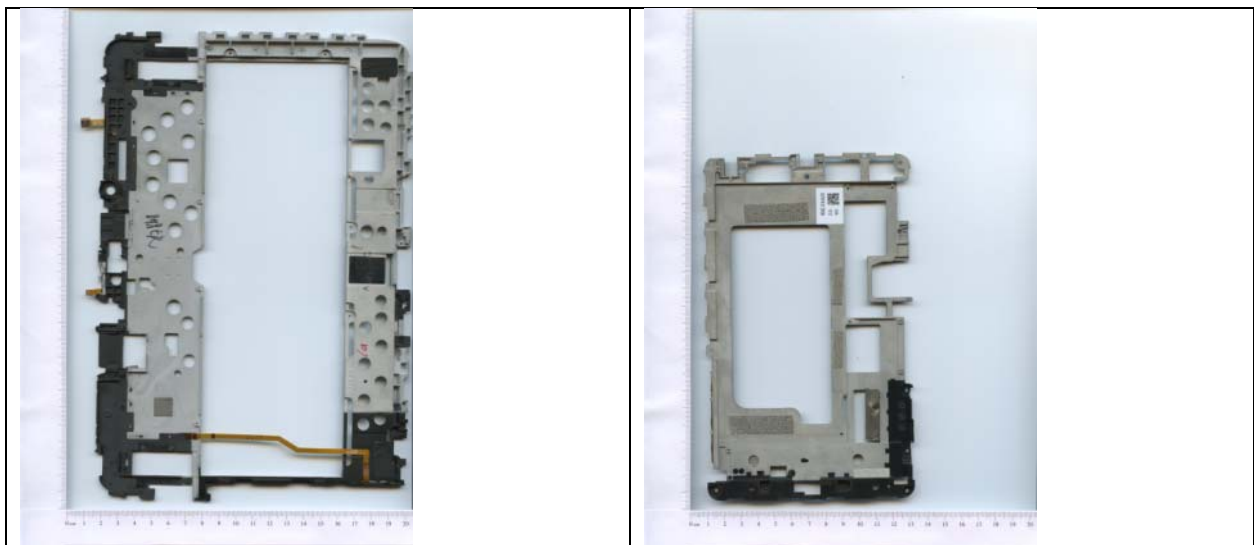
DUT_01 (left) and DUT_05 (right) disassembled frame
